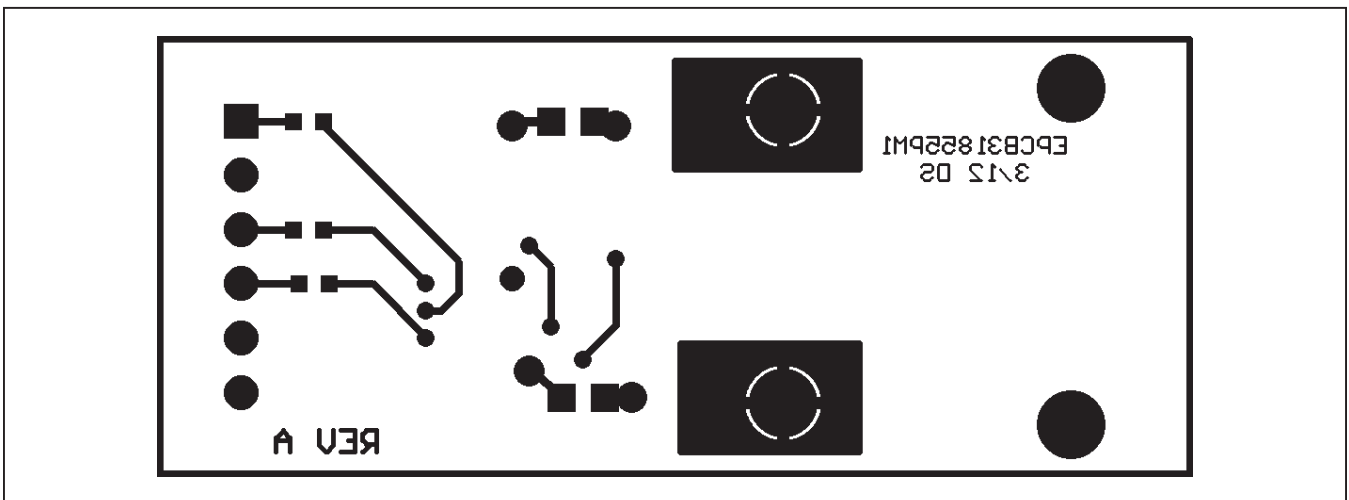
MAX31855PMB1 Peripheral Module PCB Layout—Solder Side
